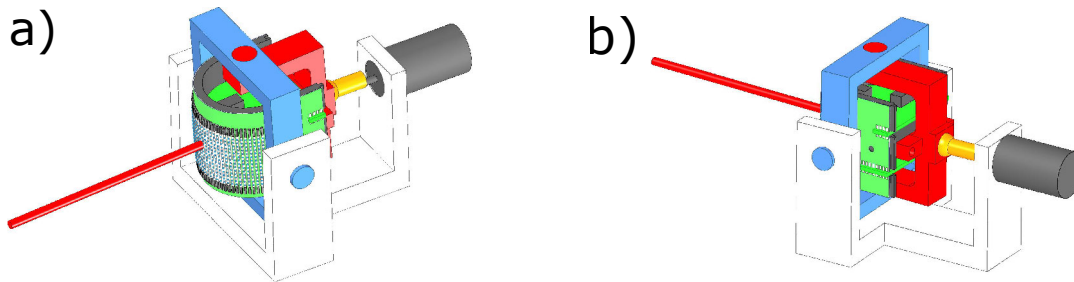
a and b) are depicted a system to enable a vibration in 2 dimensions. The sensor is mounted on a kind of a gimball assembly, but the only actuator is a motor mounted on the static frame. An eccentric shaft with a spherical joint allows the connection between the motor and the support of the sensor. The orientation axis of the sensor, shown as a red bar, is moving along a conic surface.
